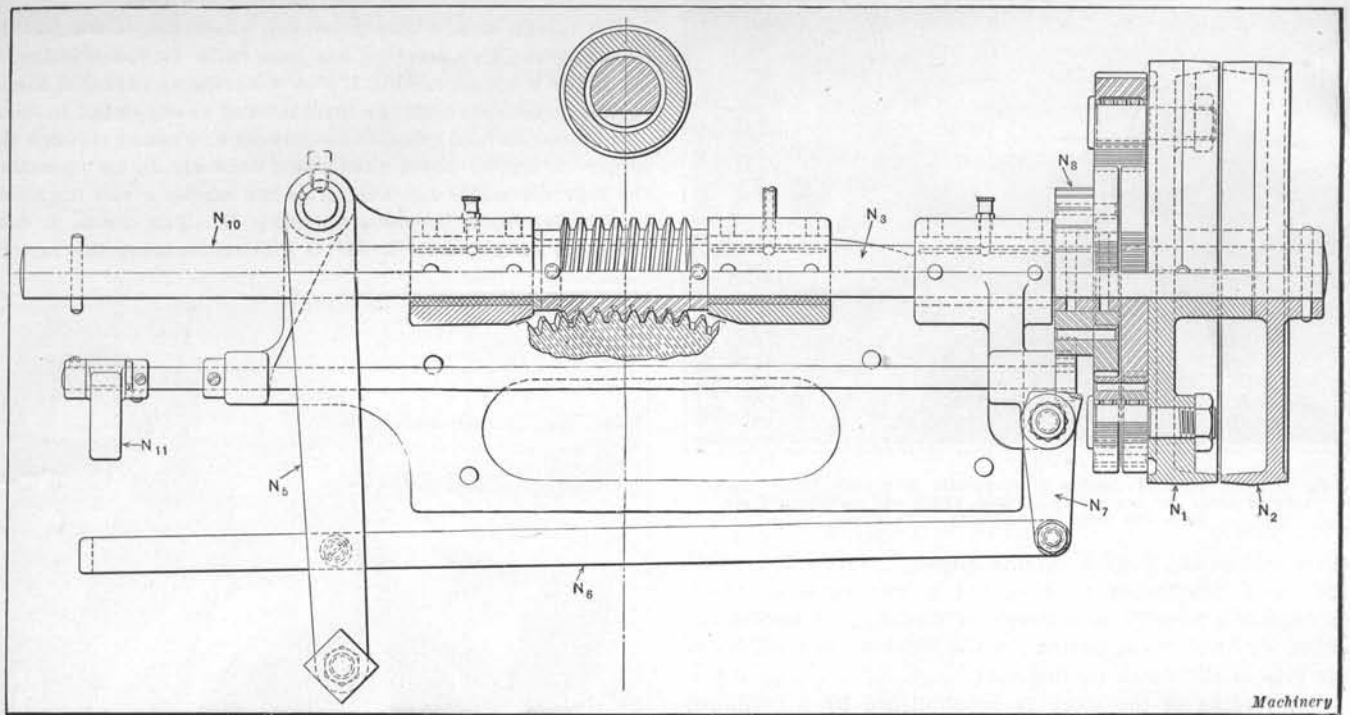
Sectional View through Power Feed Bracket, showing Differential Gear Mechanism, Indexing Worm, Driving Worm, and Worm-wheel
